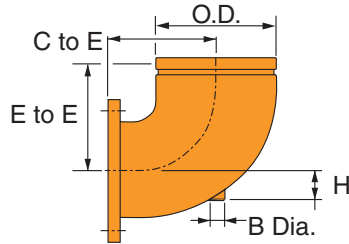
RF REDUCING BASE SUPPORT ELBOW
